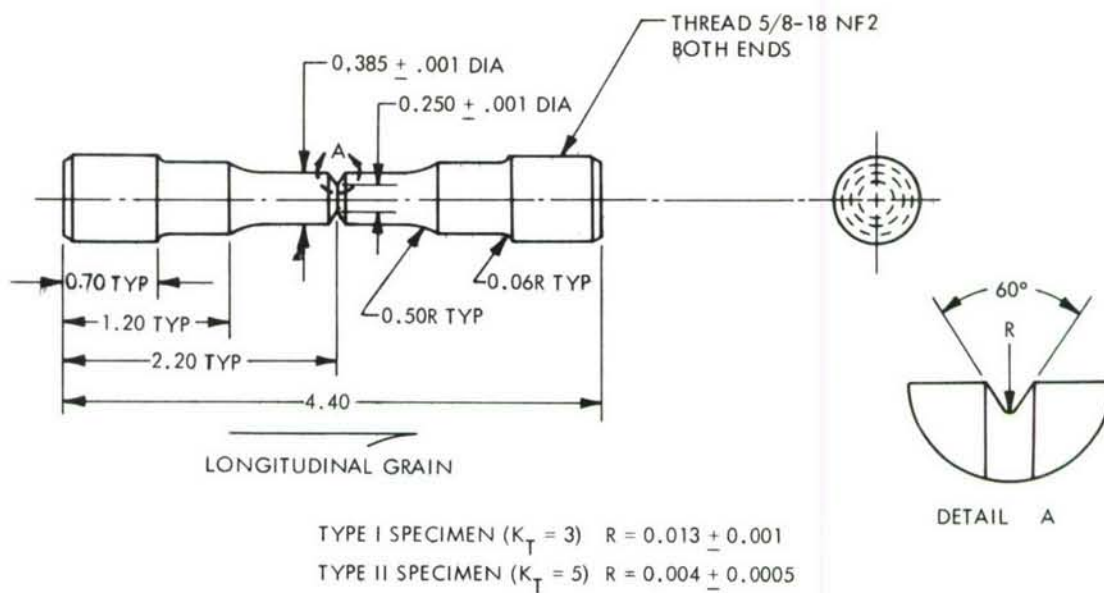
AXIAL LOAD FATIGUE SPECIMENS
